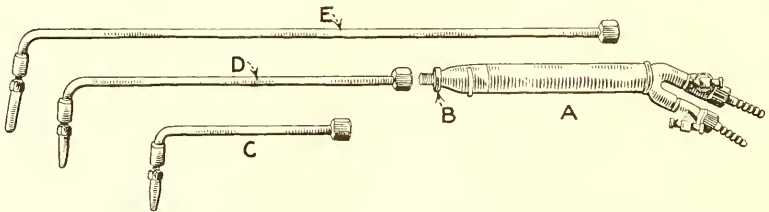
Torches Made by the General Welding & Equipment Co.
